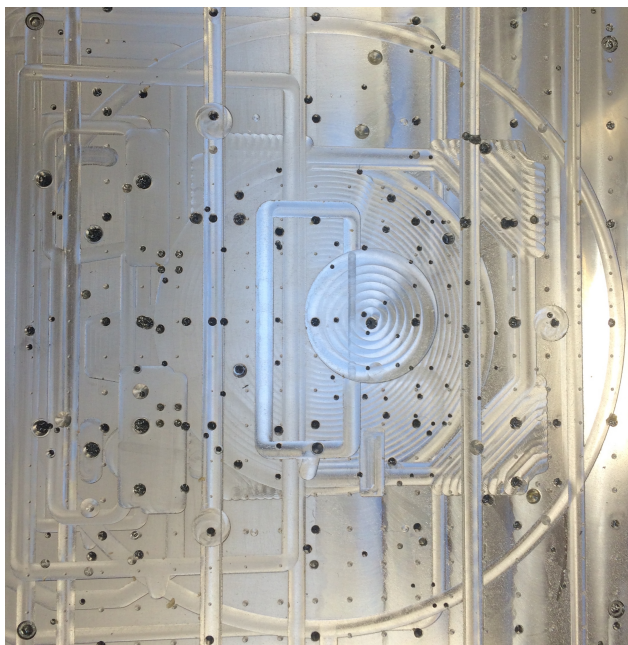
Aluminium base plate, 3-axis robotic machine, Mechanical Engineering Workshop, Physics, University of Oxford.
